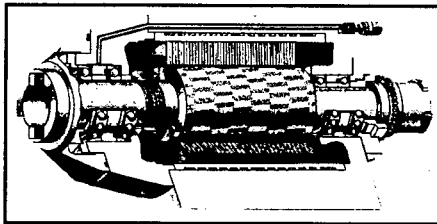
Machine Tool Spindle with Ball Bearings and Built in Motor for Machining Center (SKF)
